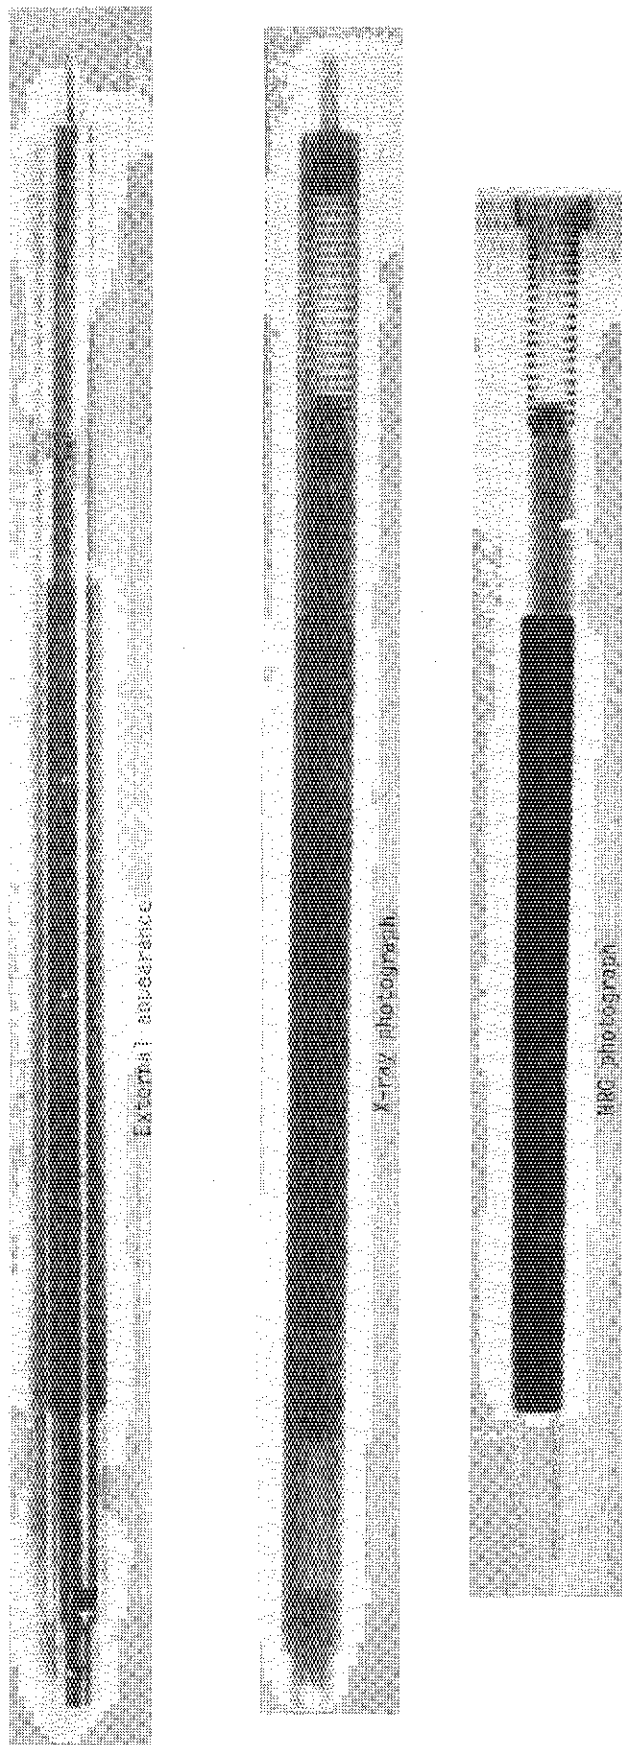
PIE photographs of Test No. 226-1 fuel rod (Flat pellet rod, 208 cal/g.  $UO_2$ )
